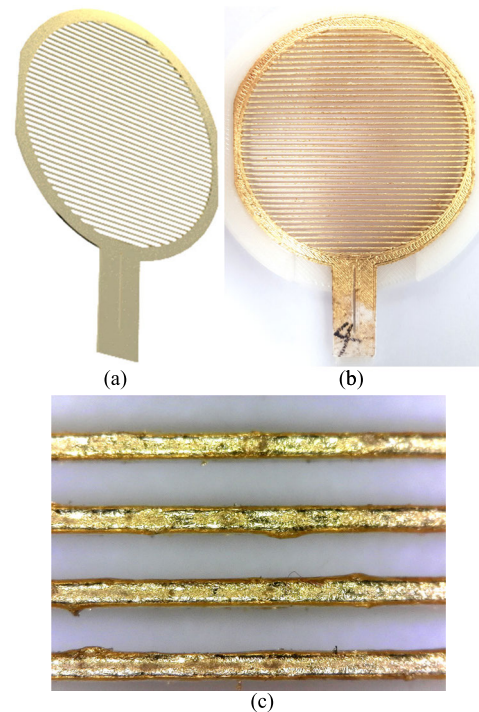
3-D printed and gold-leaf gilded grid polarizer: (a) CAD rendering; (b) photograph; and (c) zoomed-in view photograph.
